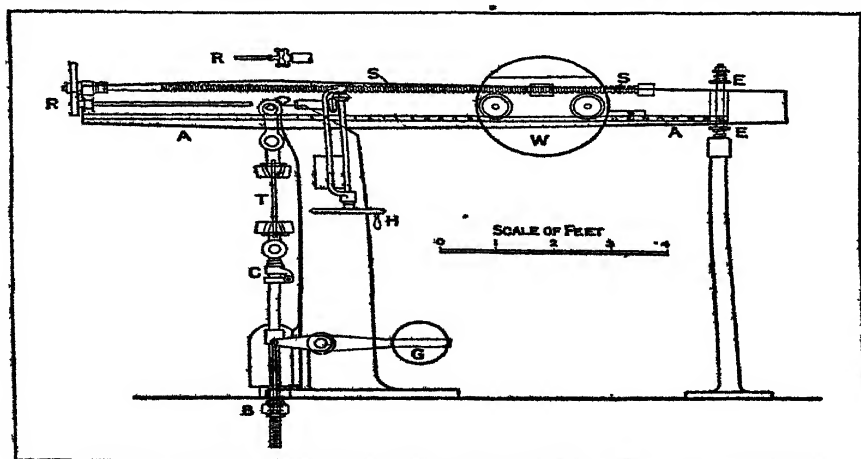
SINGLE-LEVER TESTING MACHINE
